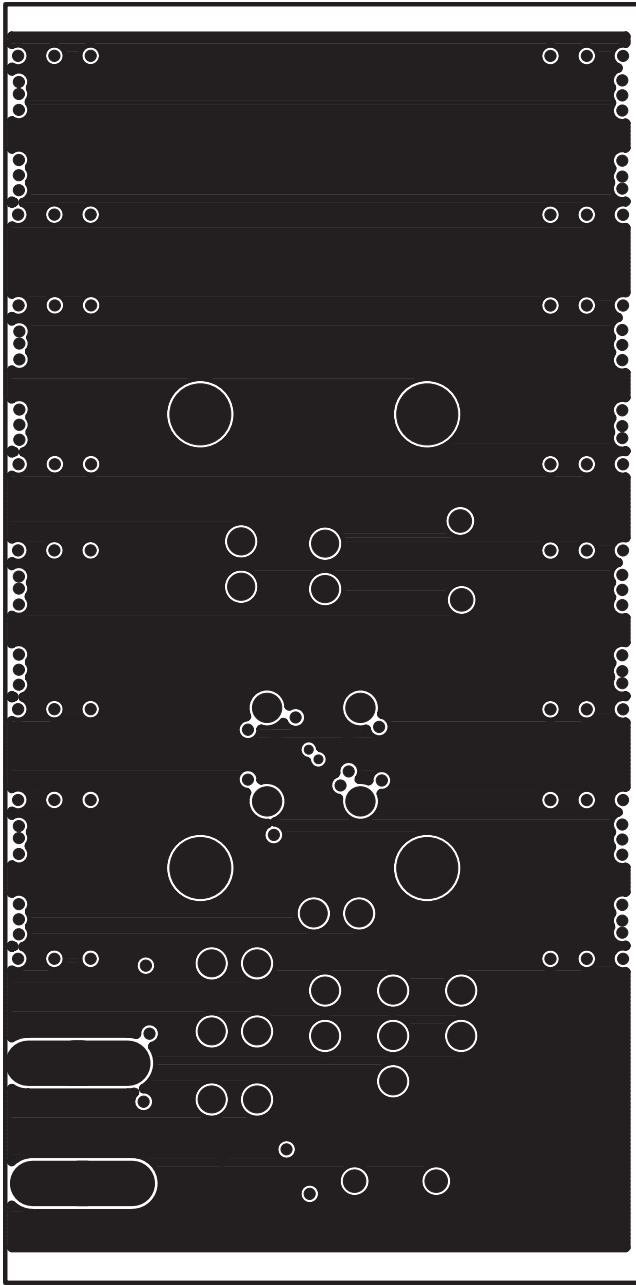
MAX3748H EV Kit PCB Layout—Power Plane (2X)
